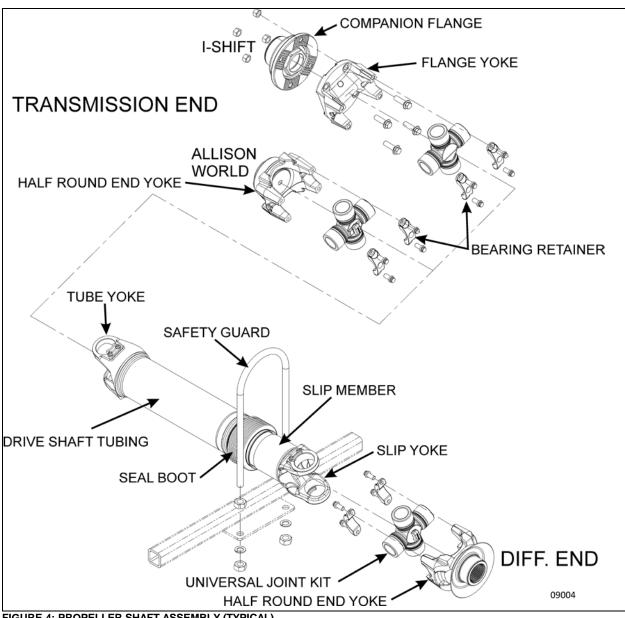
PROPELLER SHAFT ASSEMBLY (TYPICAL)
